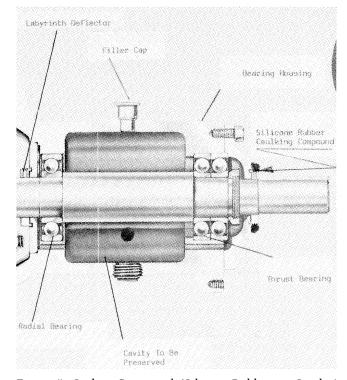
Sealing Compound (Silicone Rubber or Similar) Applied at Shaft Flinger Disk on Centrifugal Pump. (Source: Wilson-Snyder Pumps).
